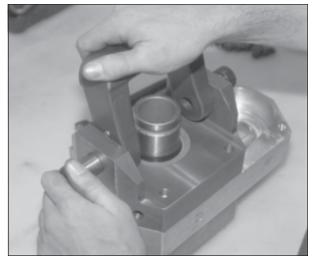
Insert left-side shoulder bolt just far enough to align hammer latch indenture with latch extension.
